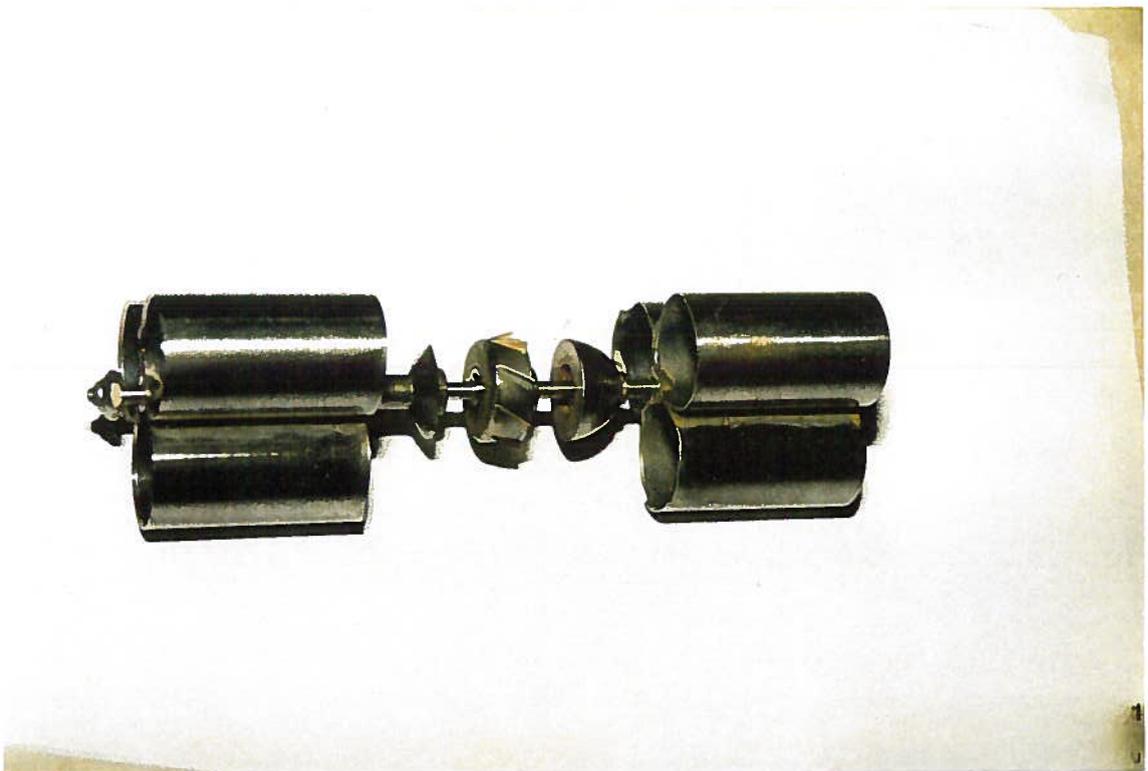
MANUFACTURER C. 50 mm DIAMETER METER, ROTOR SHAFT WEAR
